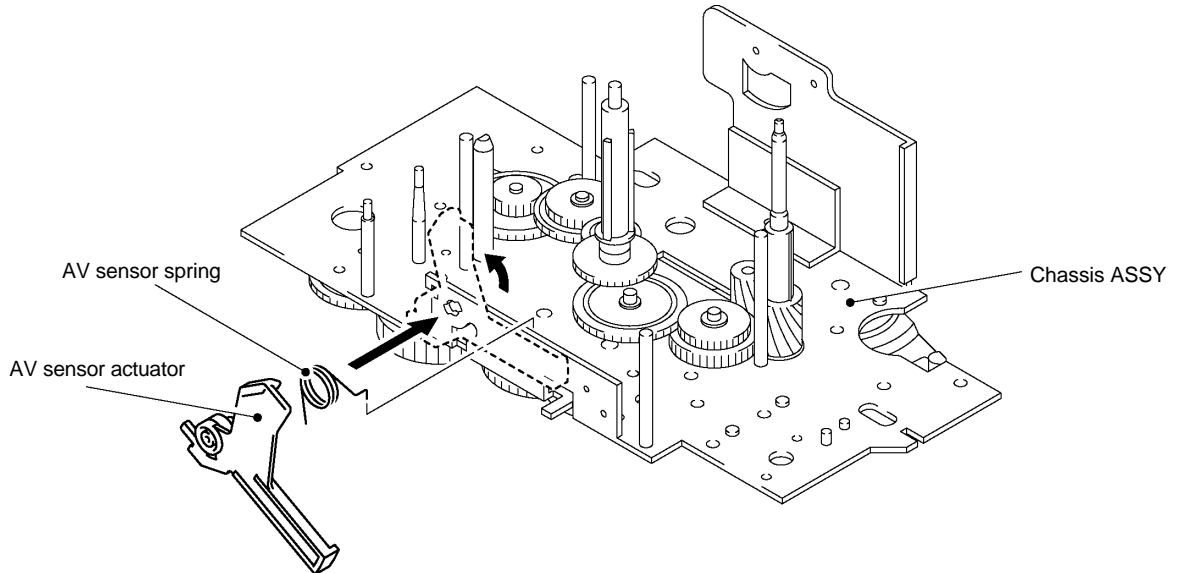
Reassembling the AV Sensor Actuator(1)
